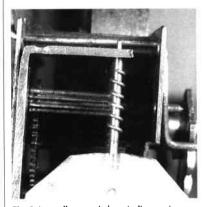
An endless made by winding a wire spirally round a spindle - still working after a century of use.
